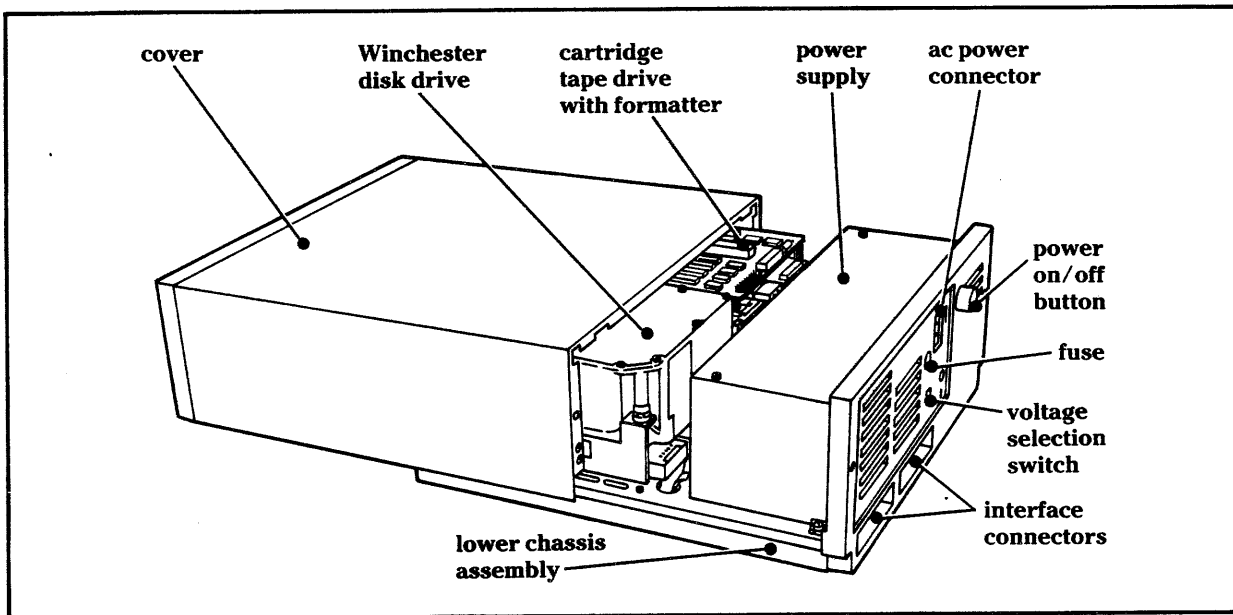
Mass Storage Enclosure — Internal View With Tape and Disk Drives
